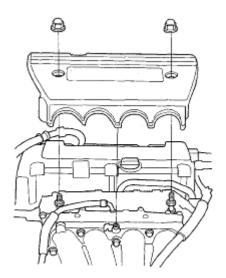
Identifying Engine Cover Courtesy of AMERICAN HONDA MOTOR CO., INC.
